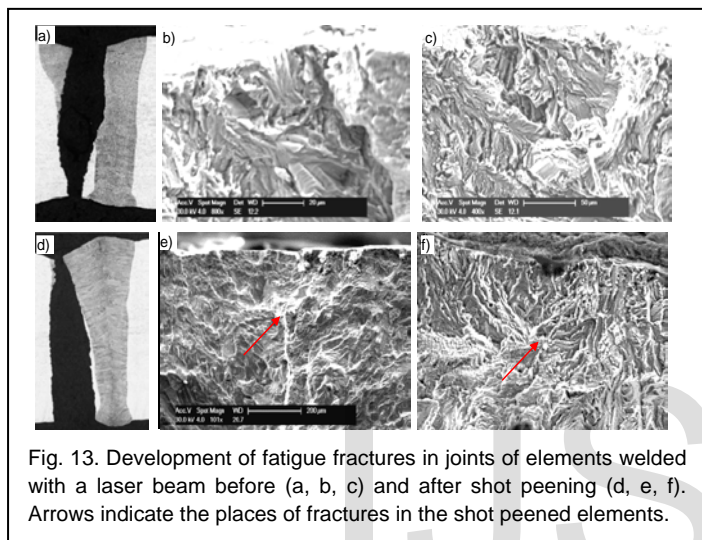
Development of fatigue fractures in joints of elements welded with a laser beam before (a, b, c) and after shot peening (d, e, f). Arrows indicate the places of fractures in the shot peened elements.
